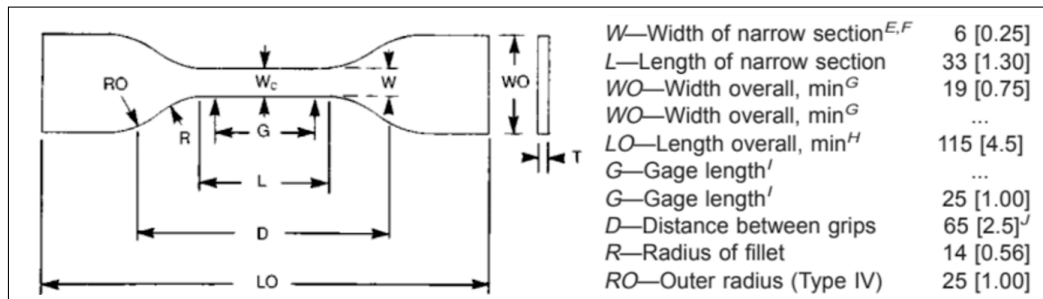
Dimensions of an ASTM Type IV tensile specimen. Units are mm [in] [8].
